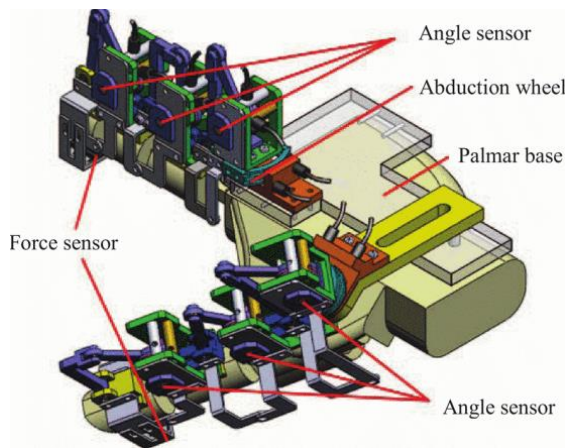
iHandRehab CAD Model [31] dorsal mounted, controls 6 joints across 2 phalanges using cable driven lever mechanisms for each joint. ©2011 IEEE
